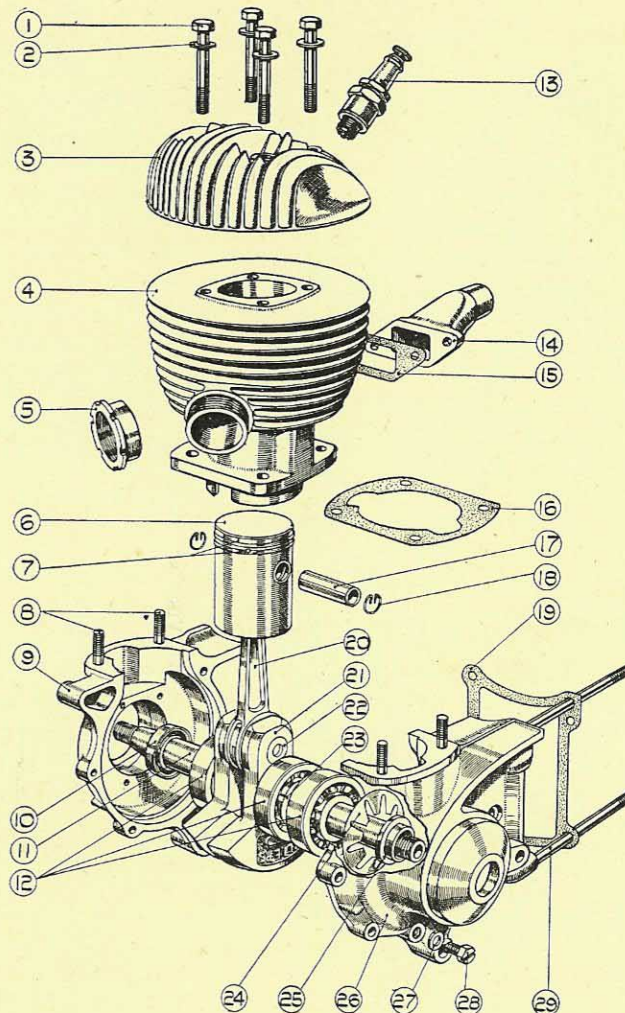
EXPLODED DRAWING OF MARK 10D ENGINE.
